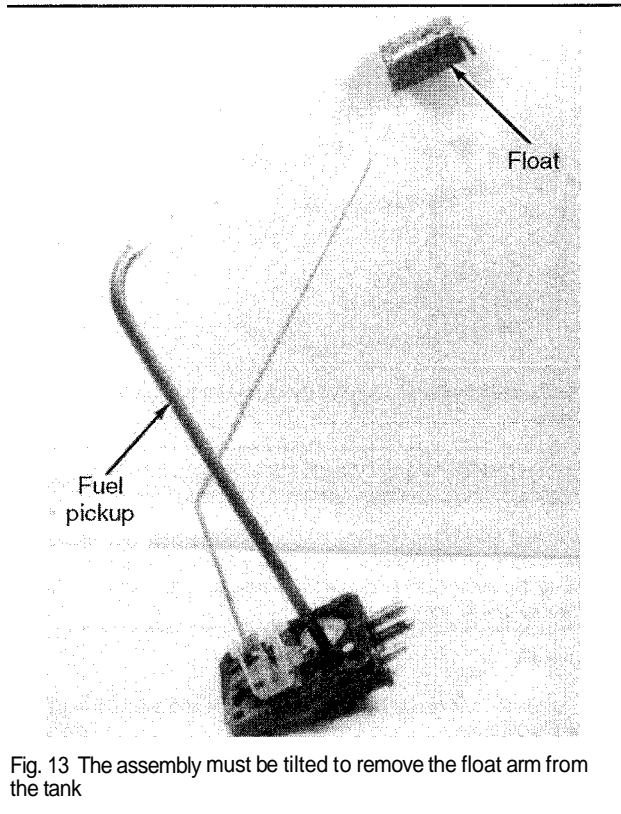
The assembly must be tilted to remove the float arm from the tank
